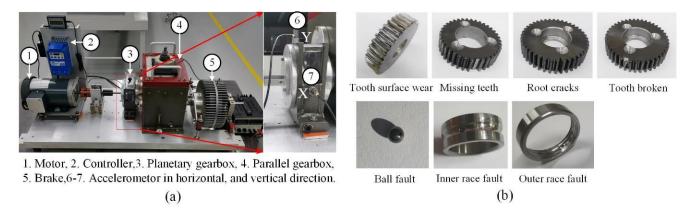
The test rig of XJTUGearbox Dataset. (a) The test rig; (b) Health conditions of gears and bearings.
